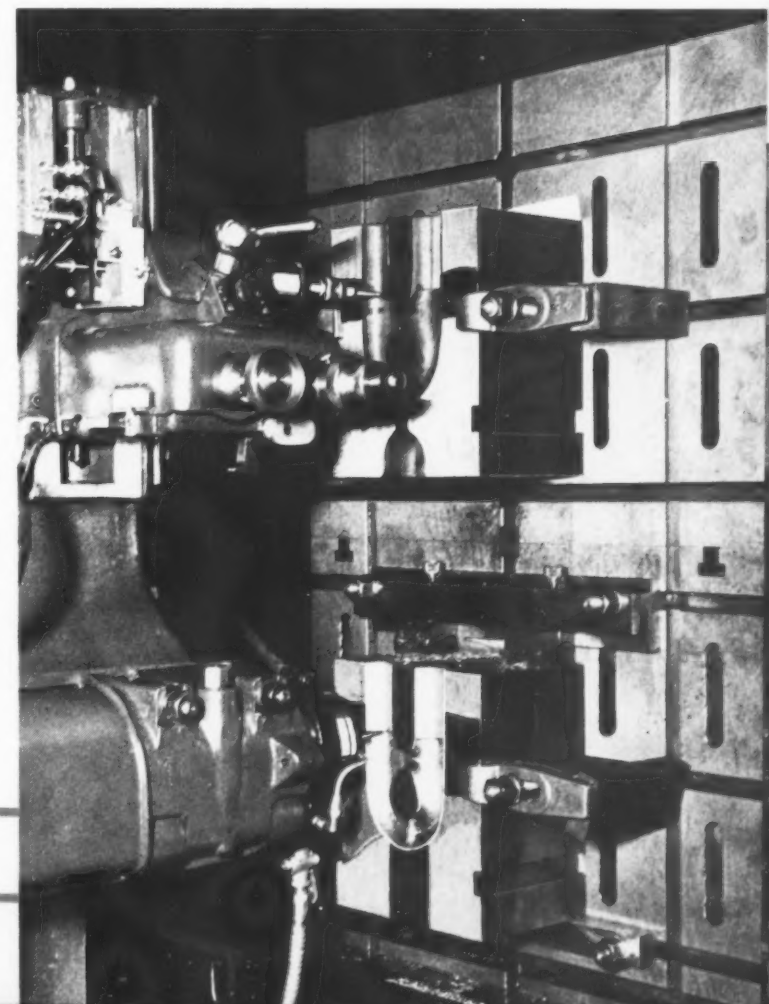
Machining Die-block for Link Member on a Kellermatic Tool-room Machine
